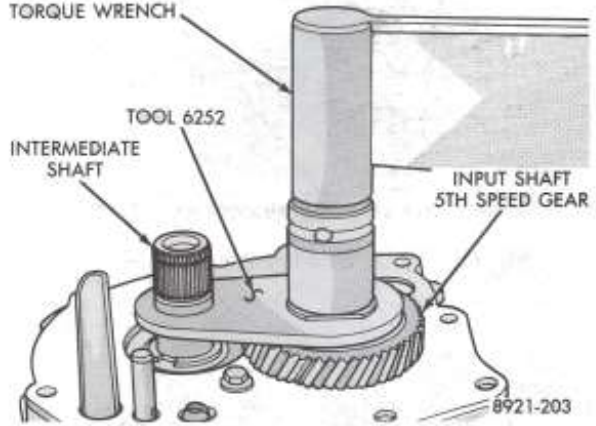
Remove or Install Input Shaft 5th Speed Gear Nut
